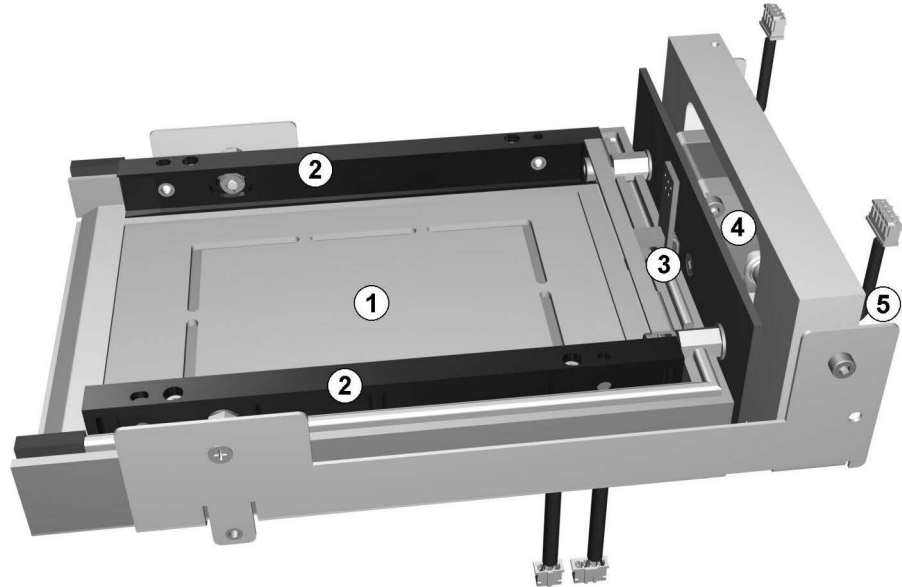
Opened incubator box with shaking motor (without upper heating plate and insulation)
